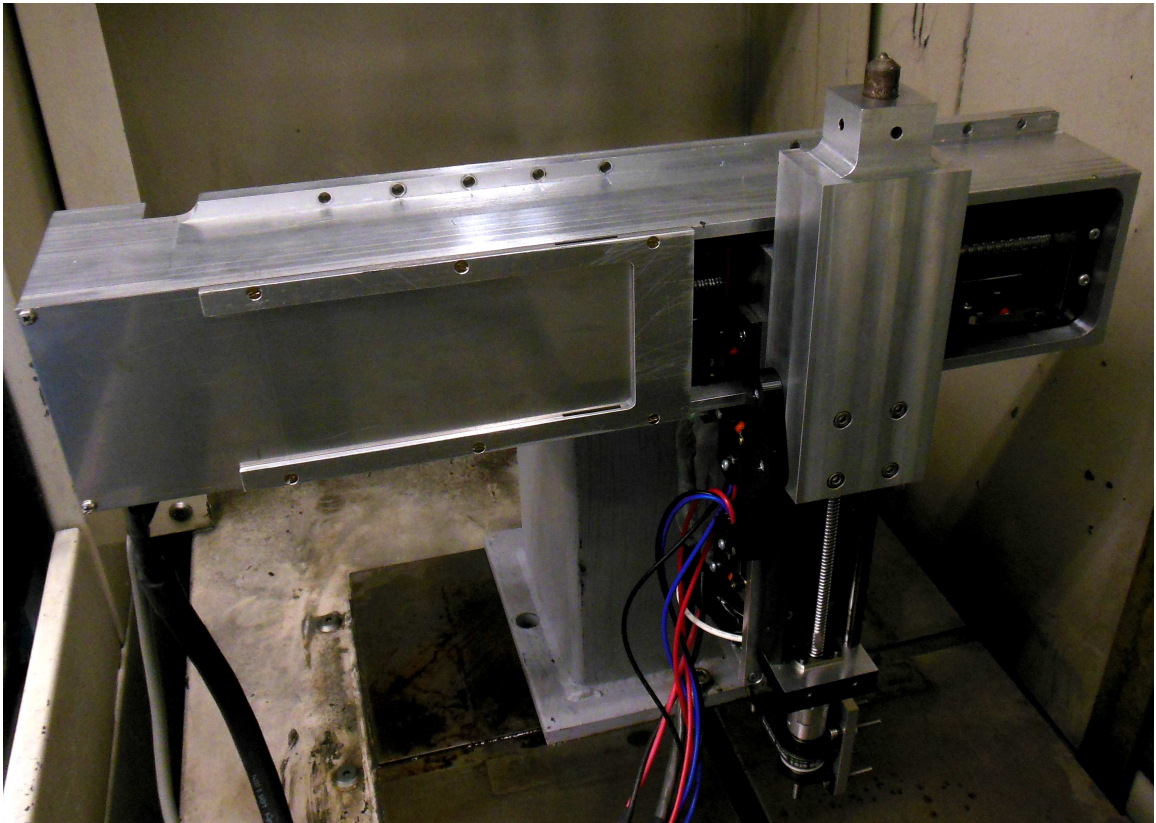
A photograph of EDGR inside the grinding machine, without its waterproof protective cover.
